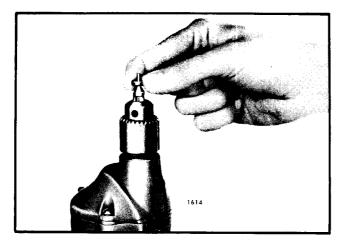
Lapping Edge of Hole in Valve Seat using Tool J 7174
